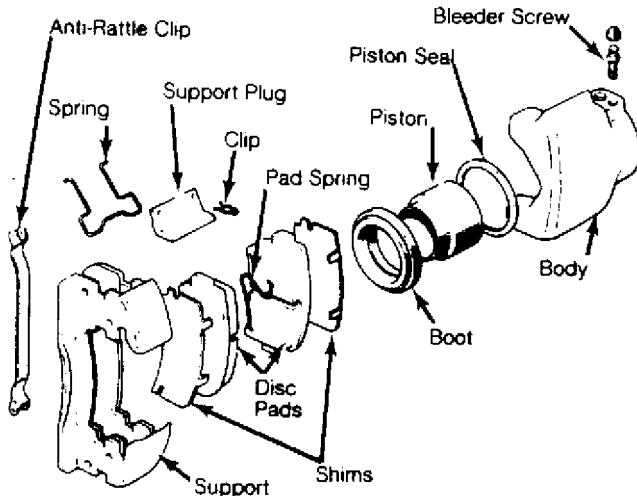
Exploded View of Pickup Front Disc Brake Caliper
